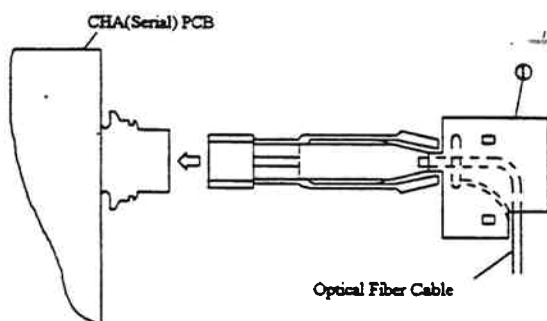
Connection of Optical Fiber Cable
